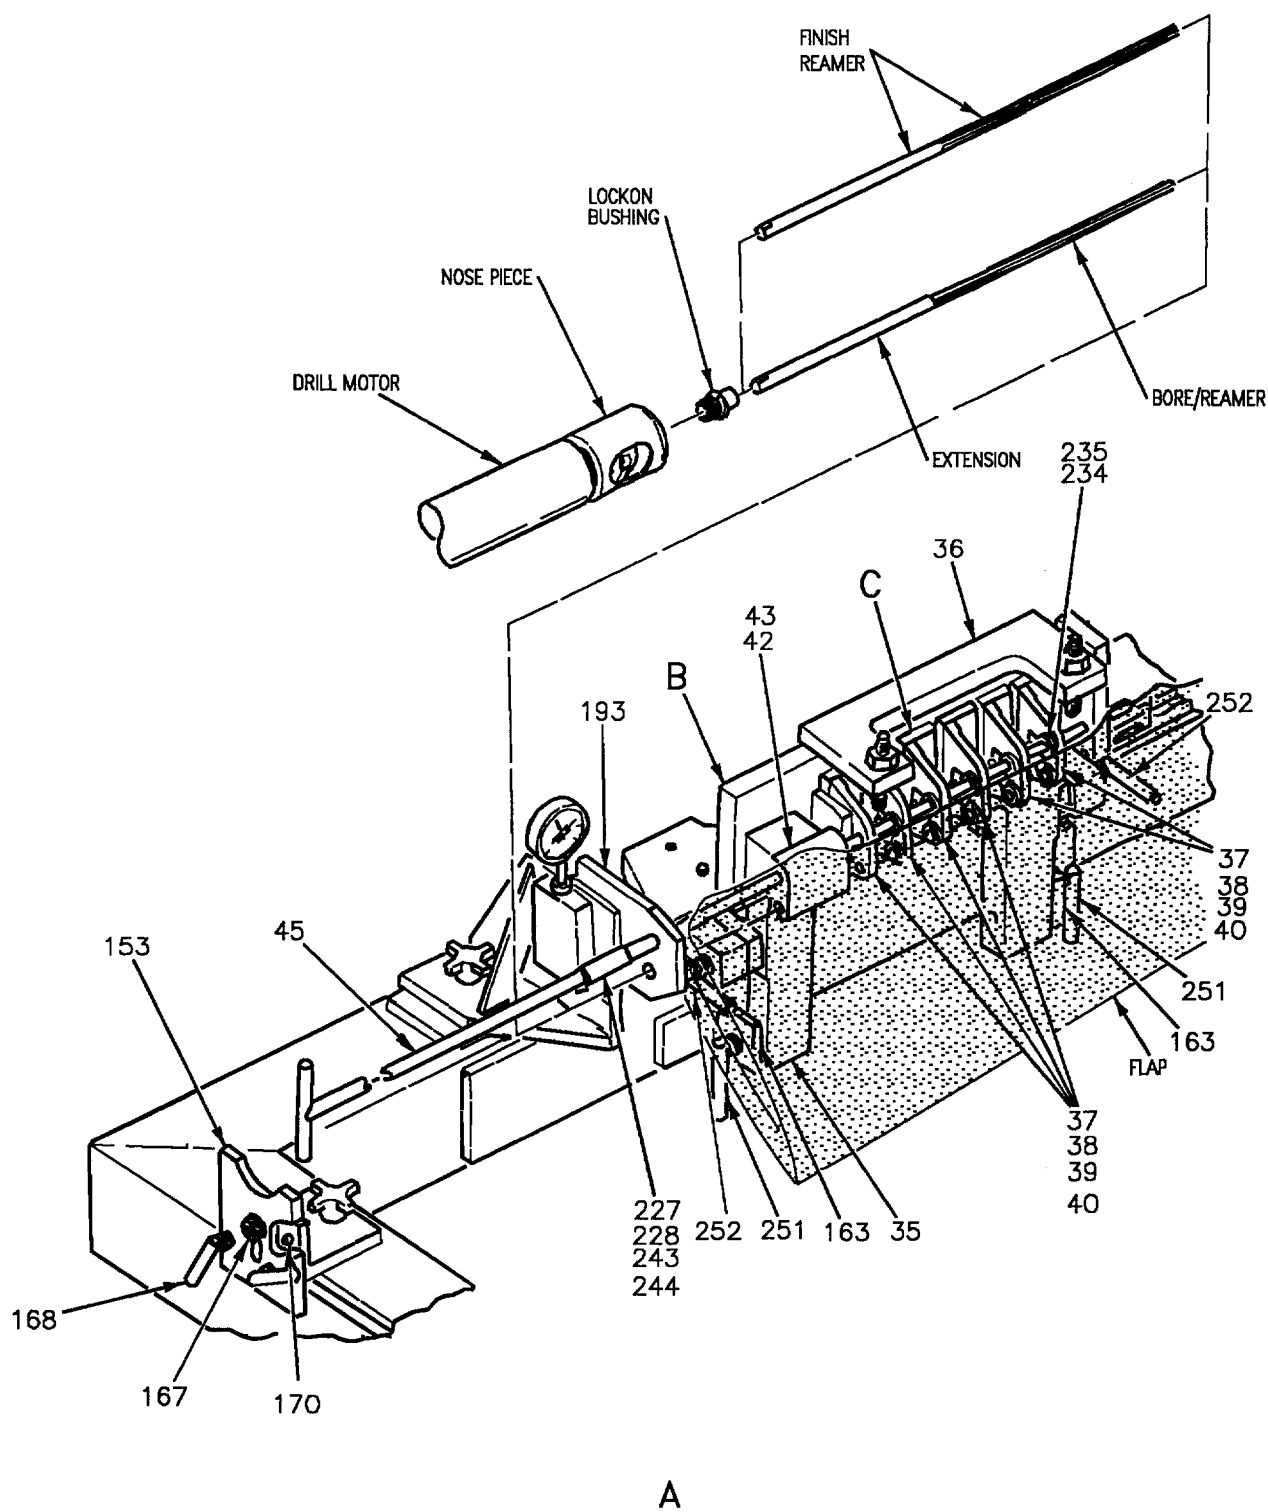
Transmission First Oversize Bushing Installation (Sheet 2)
